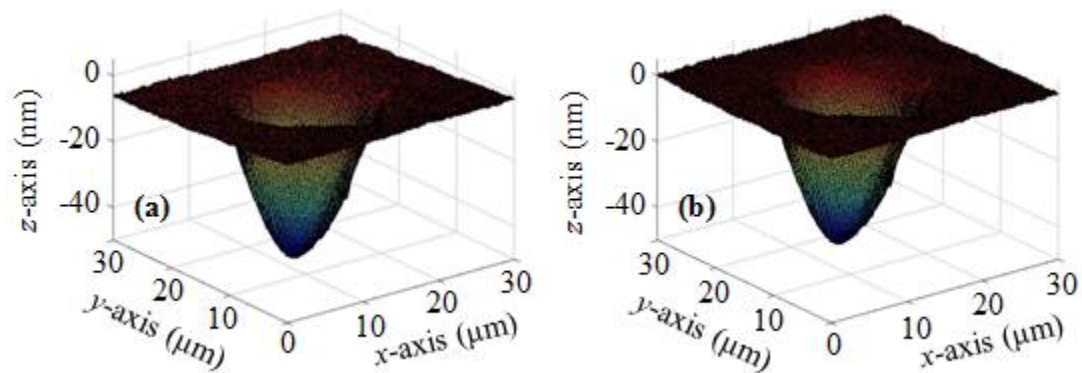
3-D plot of low-power Vortex Machining footprint before (a) and after (b) plane fitting using outer, un-machined surface locations selected by the user.
